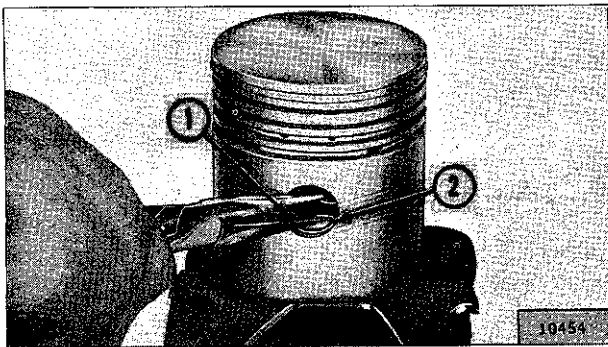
REMOVING PISTON PIN RETAINING RINGS
